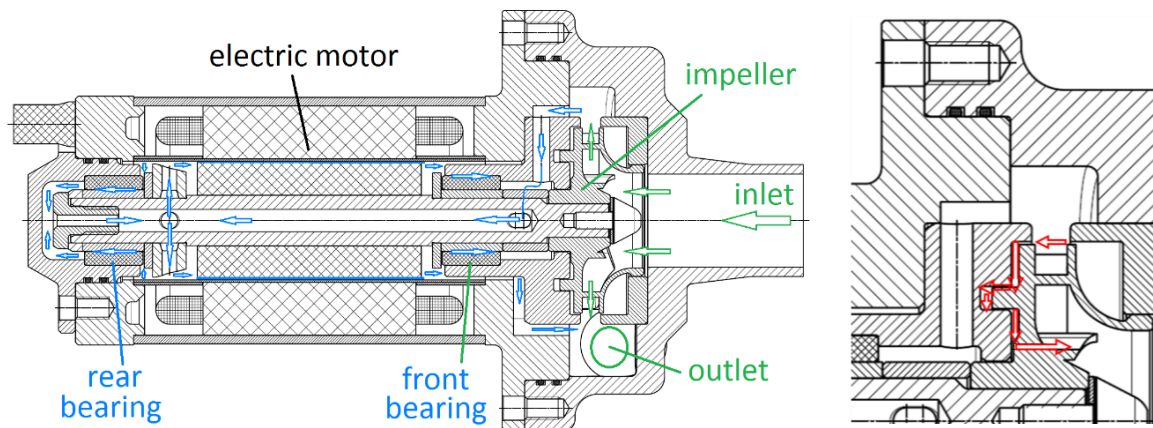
Main and secondary flows through the pump assembly (left – main and lubrication circuit, right – detail on the thrust balancing circuit)
